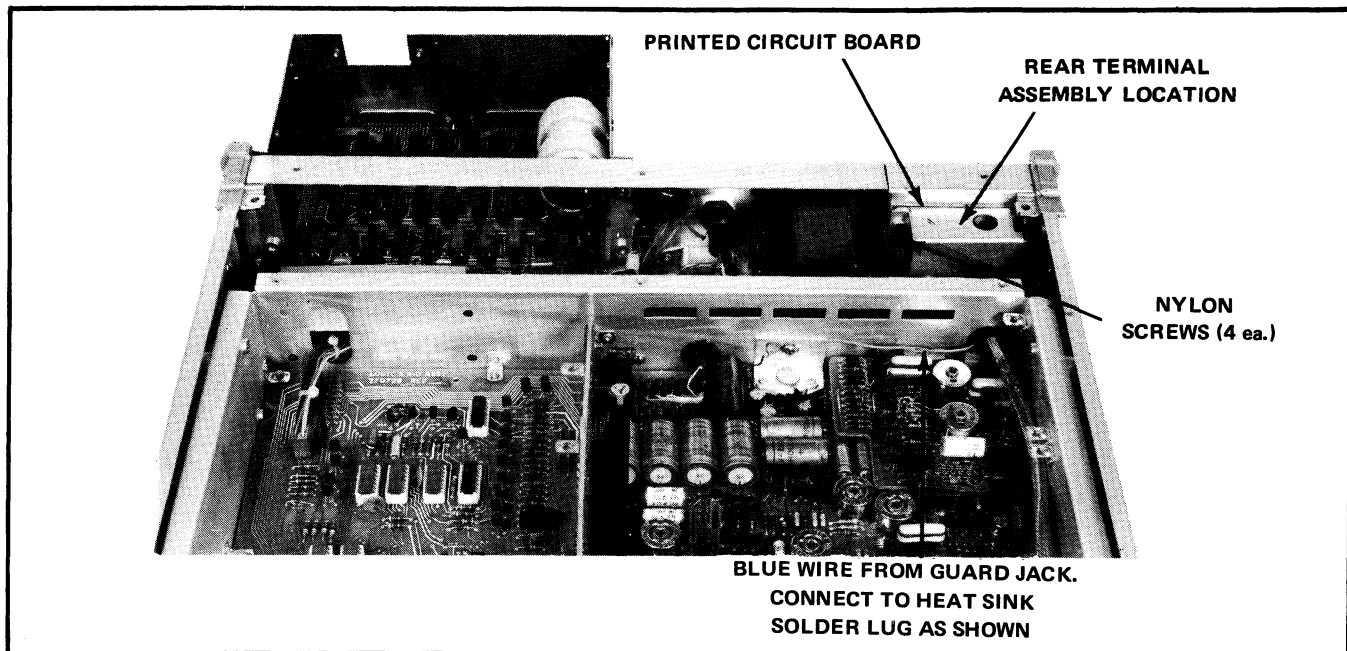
REAR TERMINAL BOARD INSTALLATION
